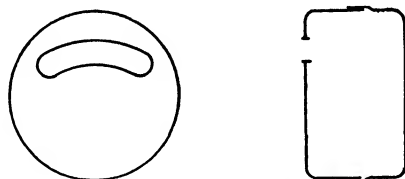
IMPROVED MILLIAMMETER CASE.
